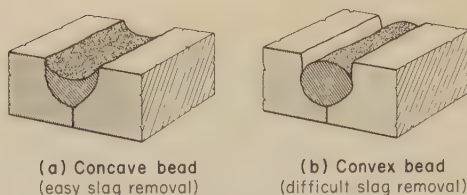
Shapes of weld beads that facilitate and hinder slag removal between passes in multiple-pass submerged-arc welding
